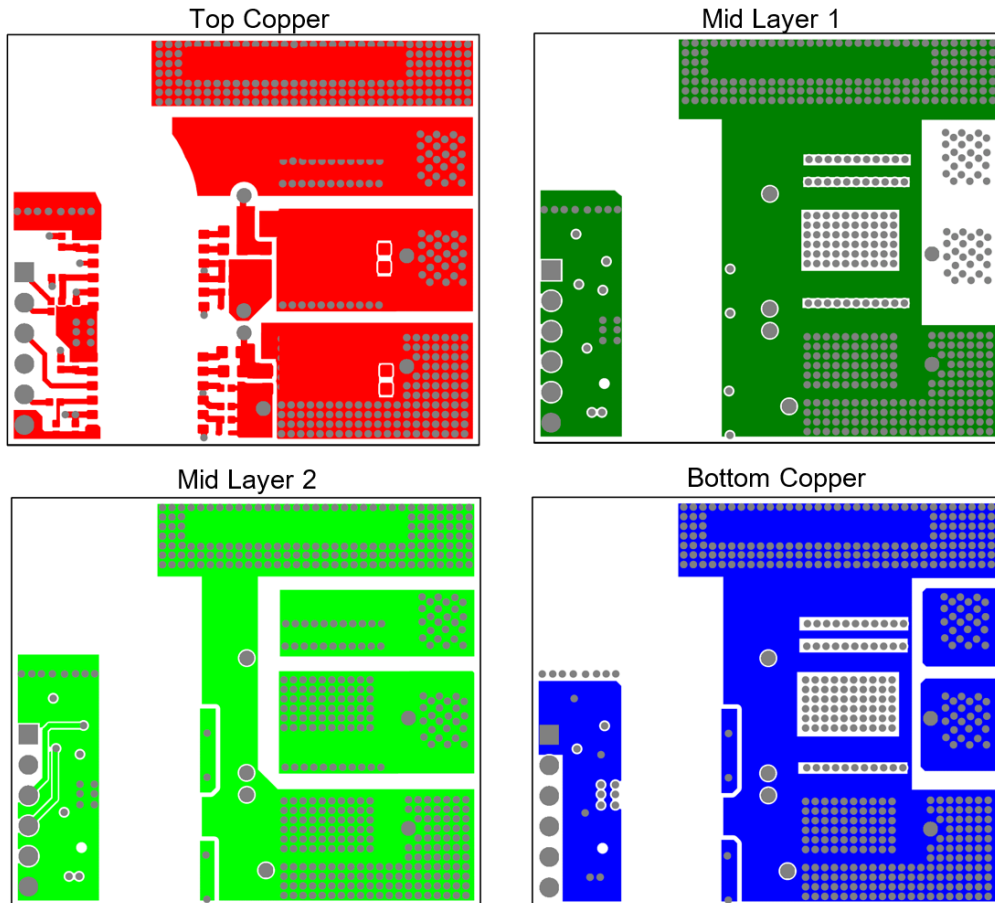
APEK85110KNH-01-T-MH PCB Copper Layers
